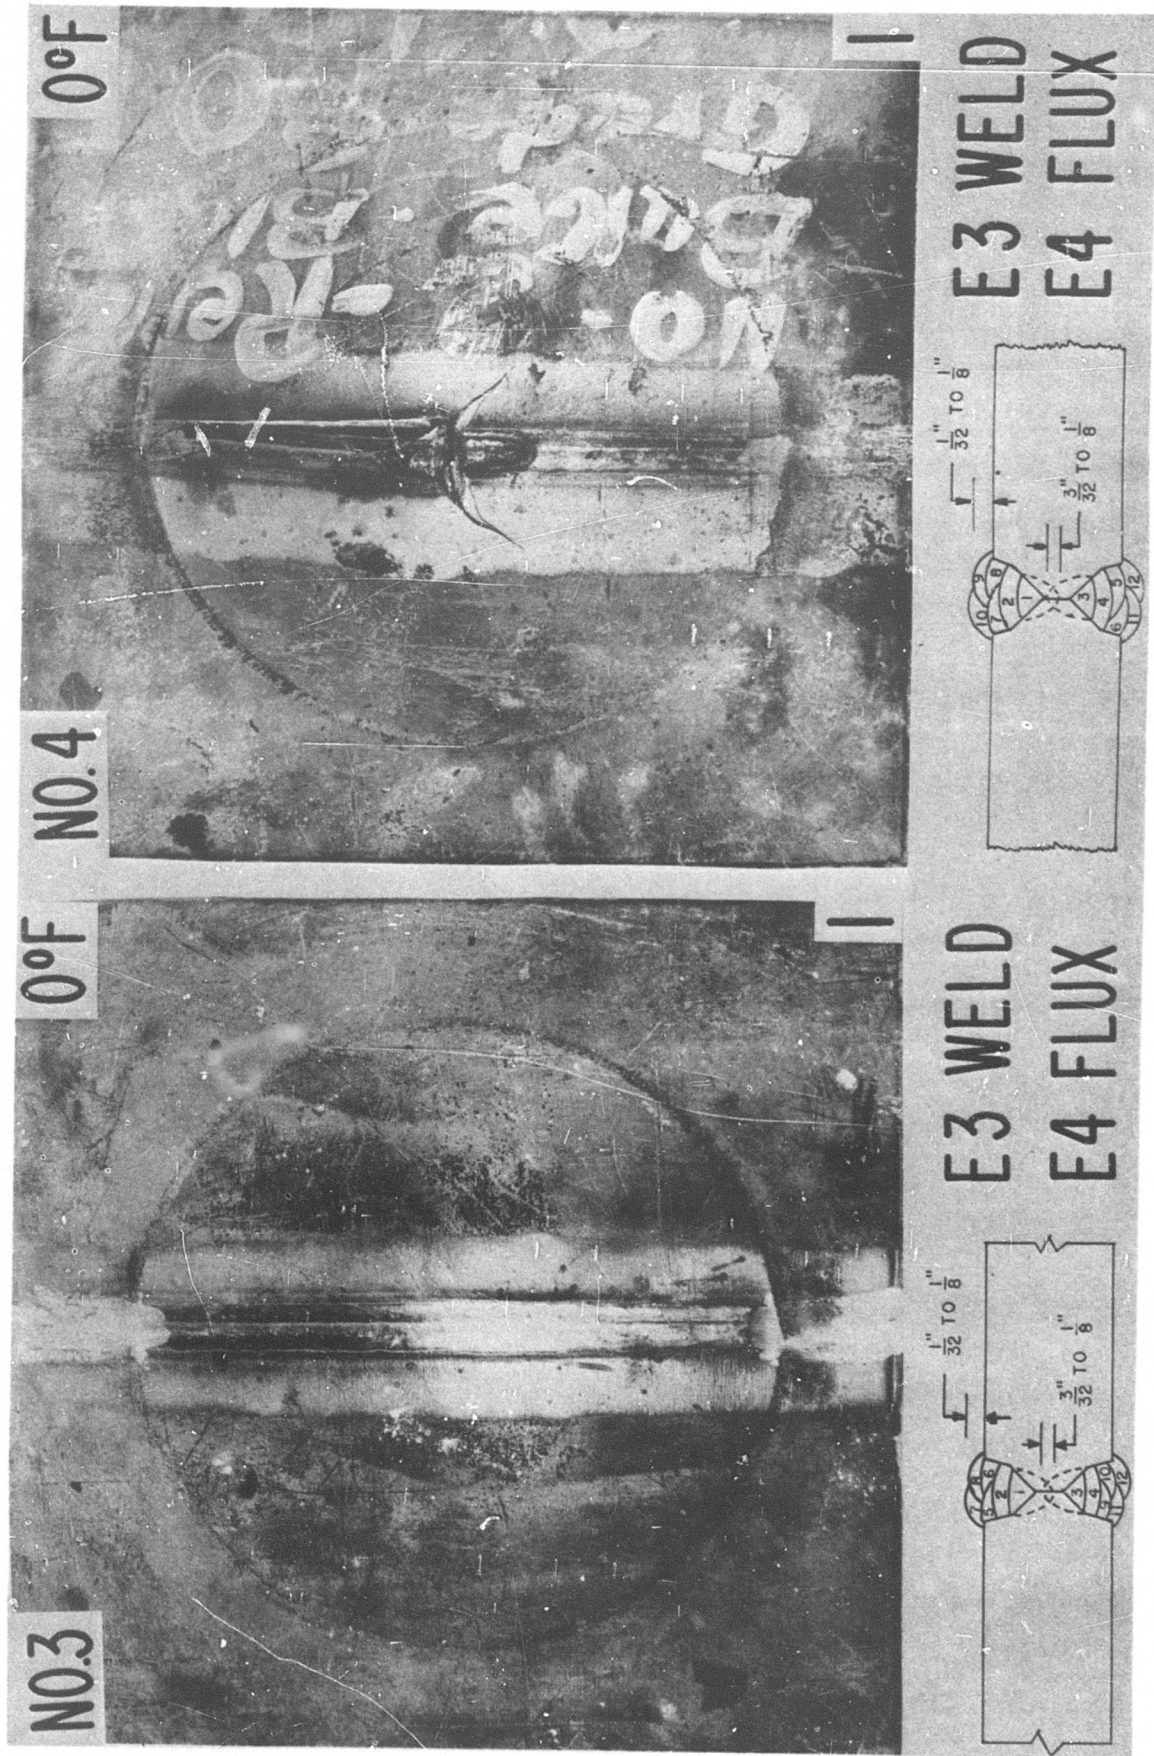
Explosion-bulge test fracture characteristics of submerged-arc weldments fabricated by MINSY. Sample No. 4 was modified with crack-starter weld.
